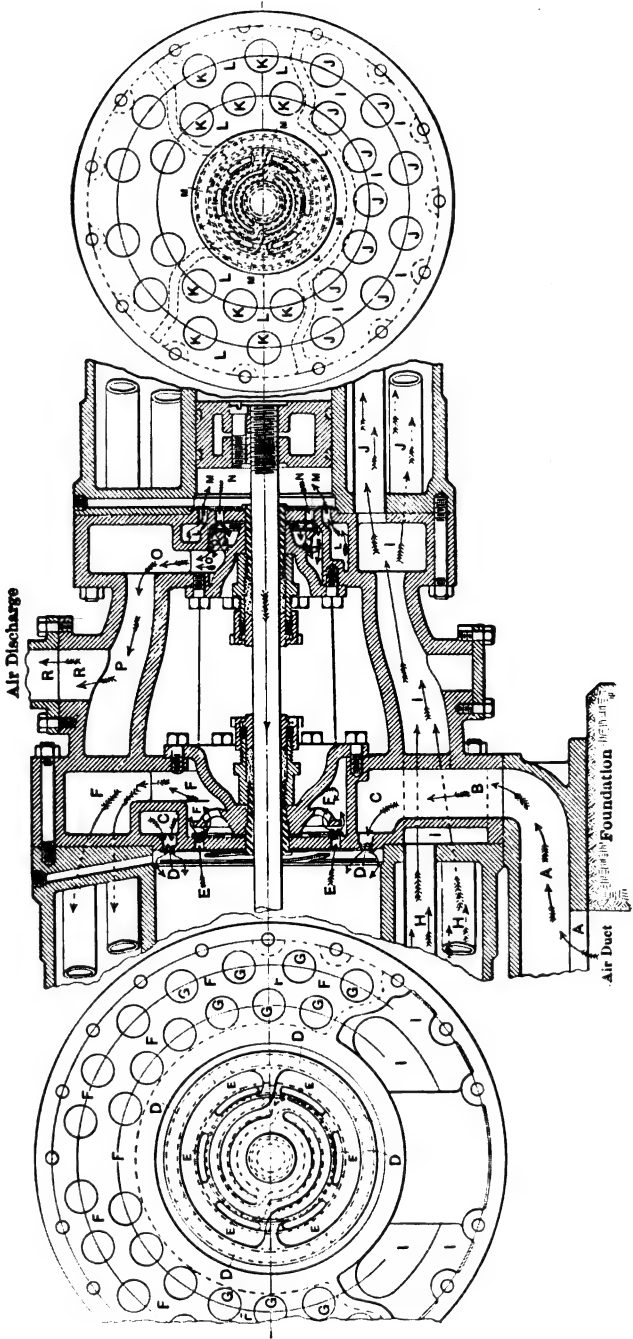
Leyner Compressor. Part Section Showing Flat Annular Inlet and Delivery Valves.
